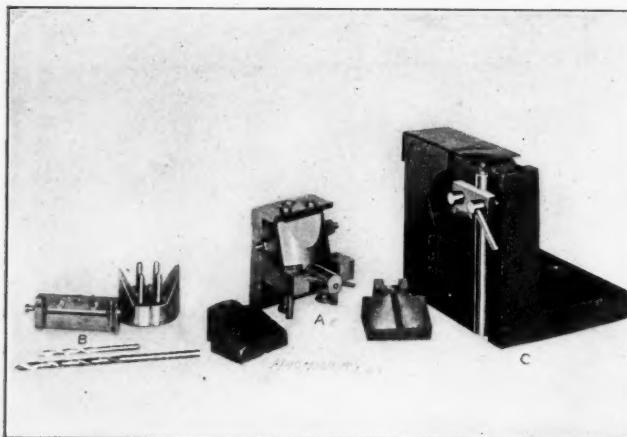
Two Jigs and a Fixture used in the Construction of the Block
